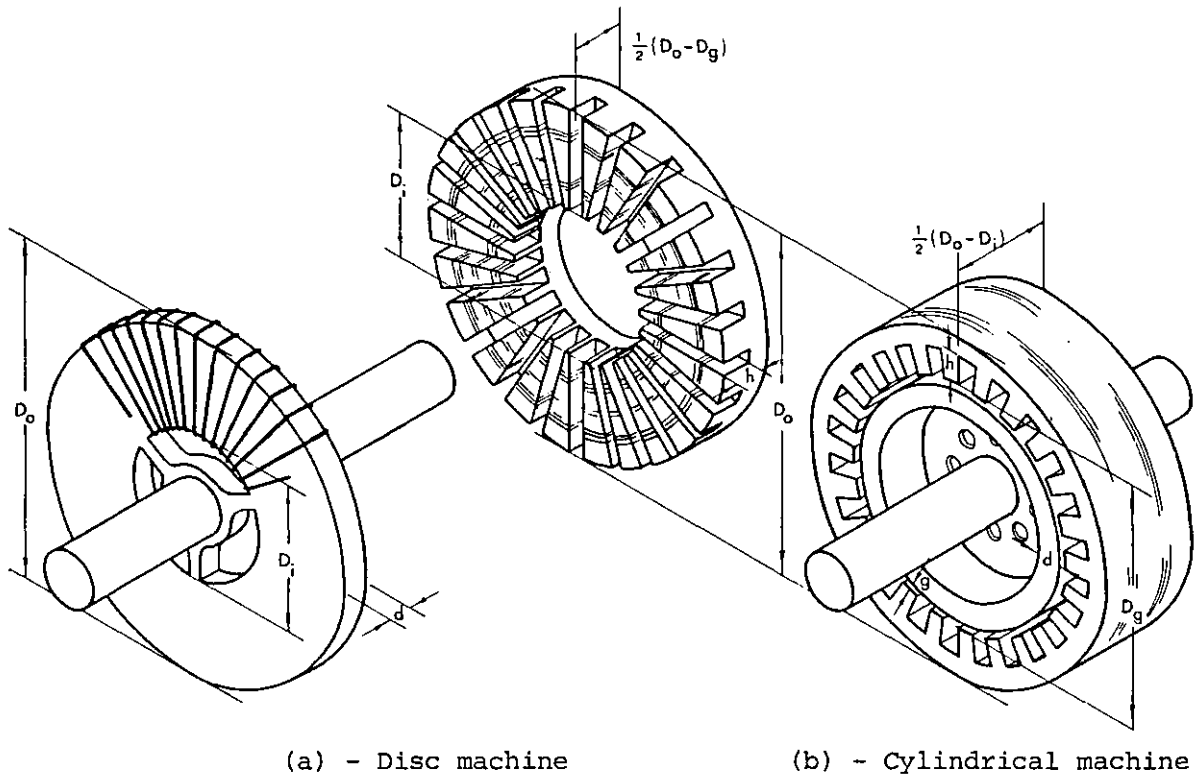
Single-sided disc and conventional cylindrical machines
